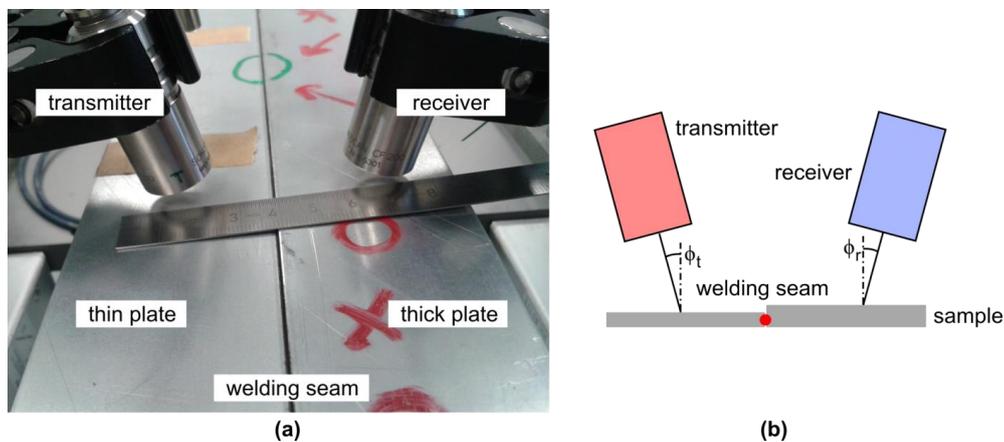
Experimental setup for the welding seam inspection (a) and (b). Tape measure shows mm units.
